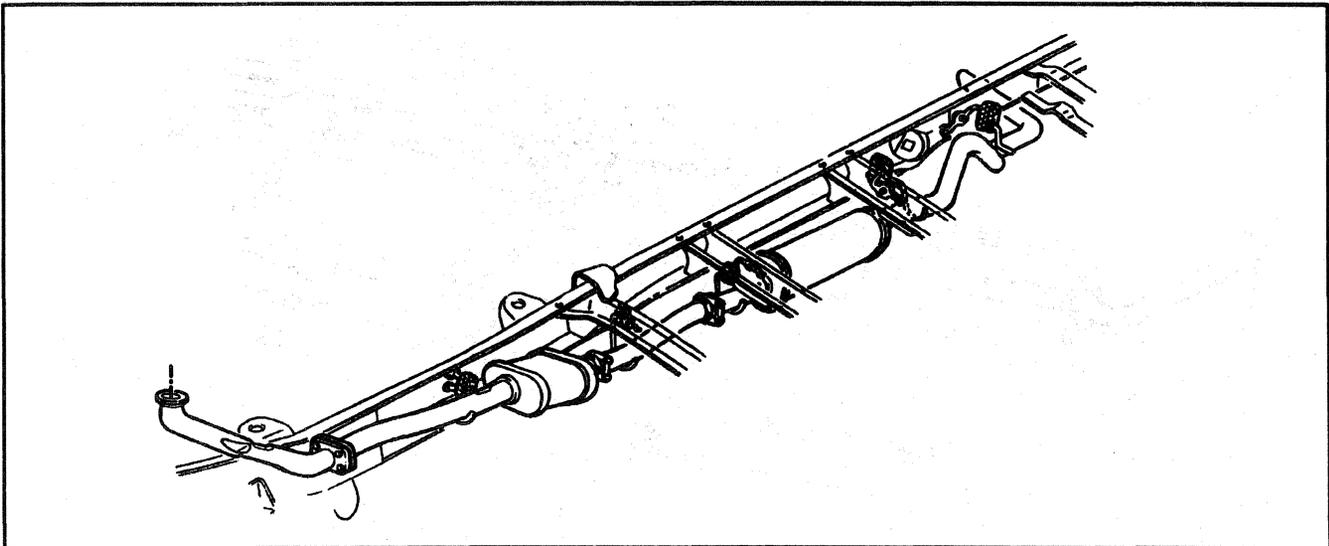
Exhaust System - C/K 314 Cab Chassis w/6.5L Diesel Engine under 15,000 GVW
